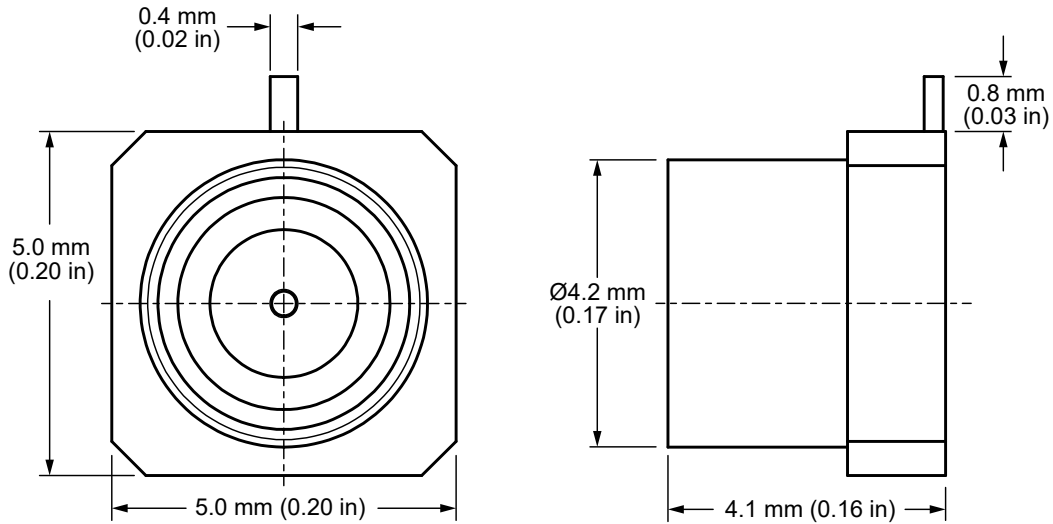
Product Dimensions for the CONSMP001-SMD-G-T Connector
